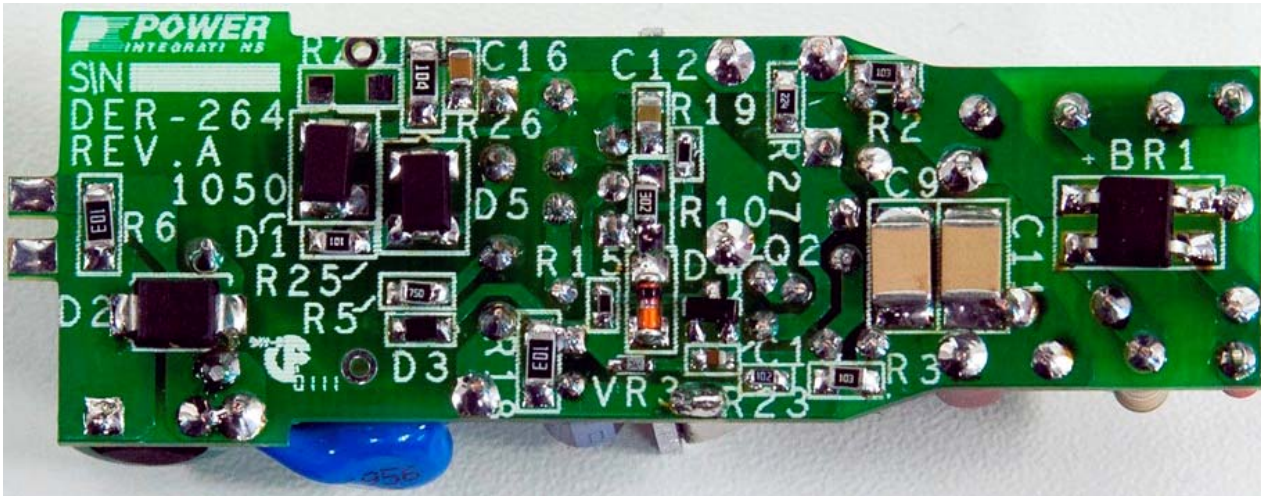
Populated Circuit Board Photograph Single Sided PCB (Bottom View).
